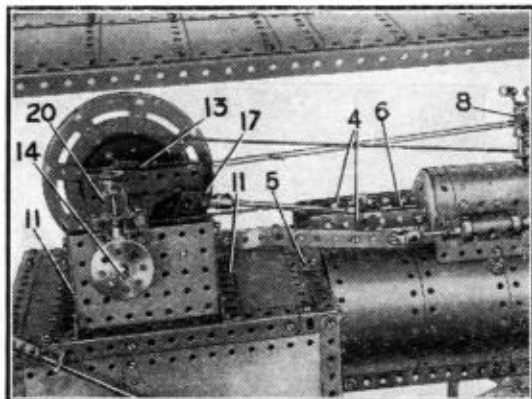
The engine, showing details of the crankshaft, slide bars, crosshead and the governor drive.
